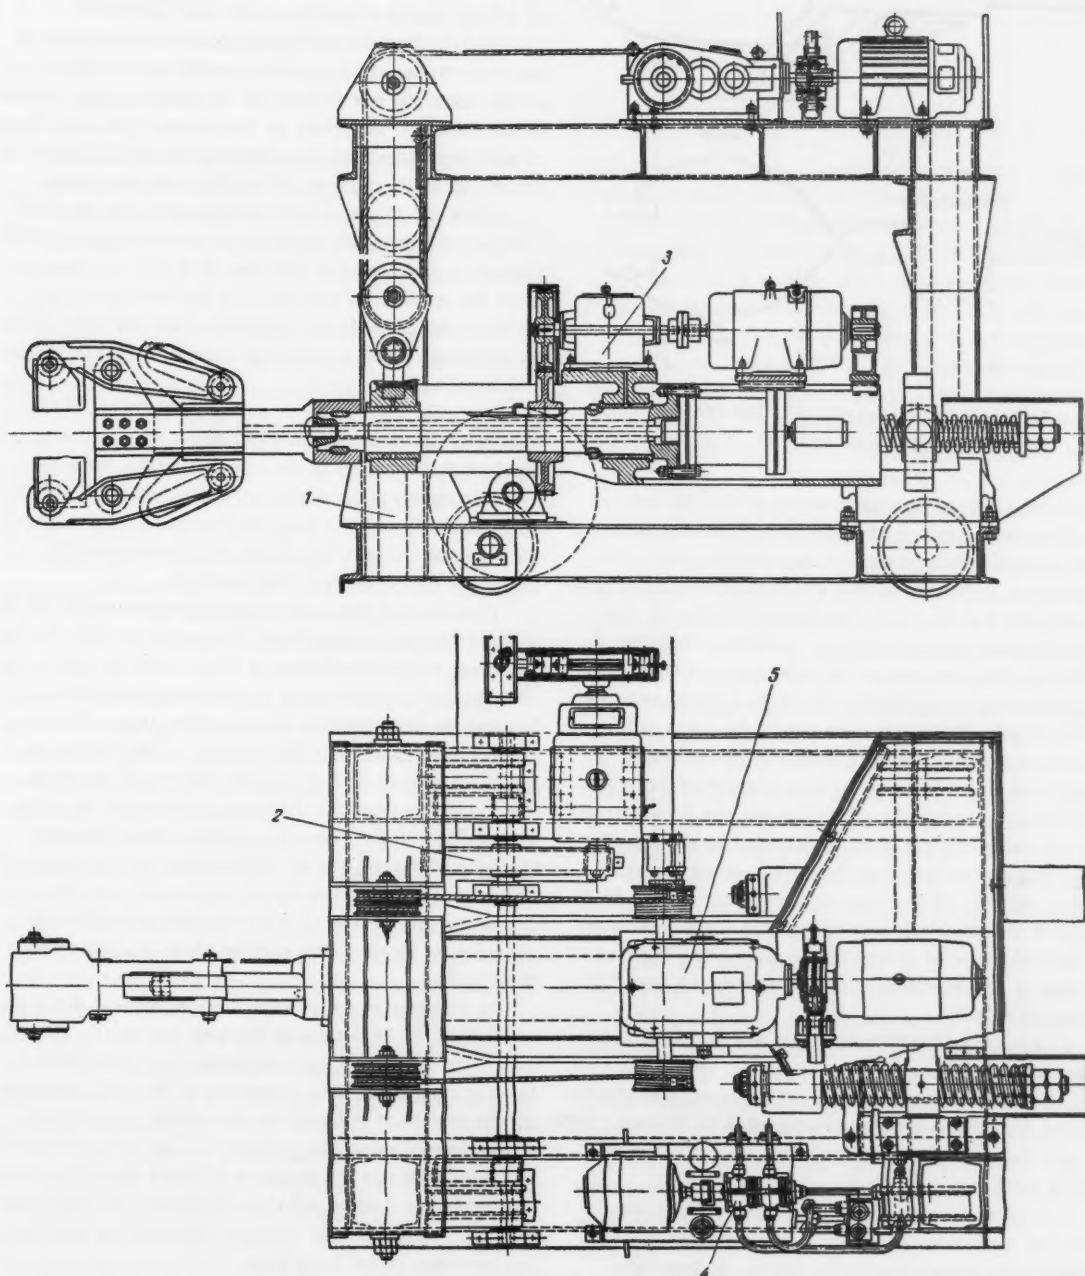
Forging manipulator of one-ton lifting capacity. 1) Framework; 2) mechanism for moving the manipulator; 3) mechanism for turning the holder; 4) tong clamping device; 5) mechanism for lifting and lowering the holder.
